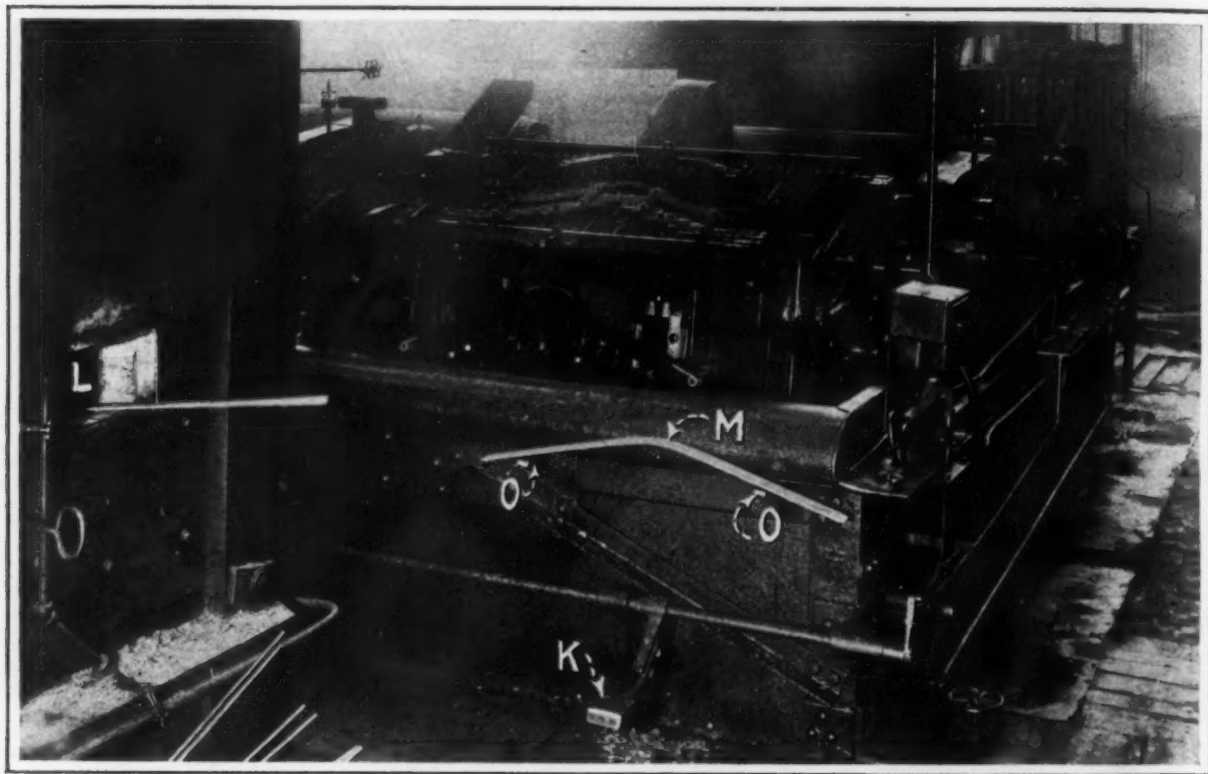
The Forming and Quenching Machine Which Takes the Plates from the Hardening Furnaces at the Left
